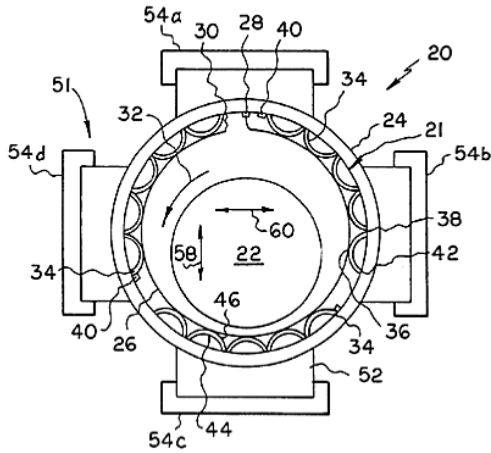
Early hybrid foil-magnetic bearing concept that nests the foil bearing inside electromagnetic coils to create a “smart” bearing (Ref. 22).
